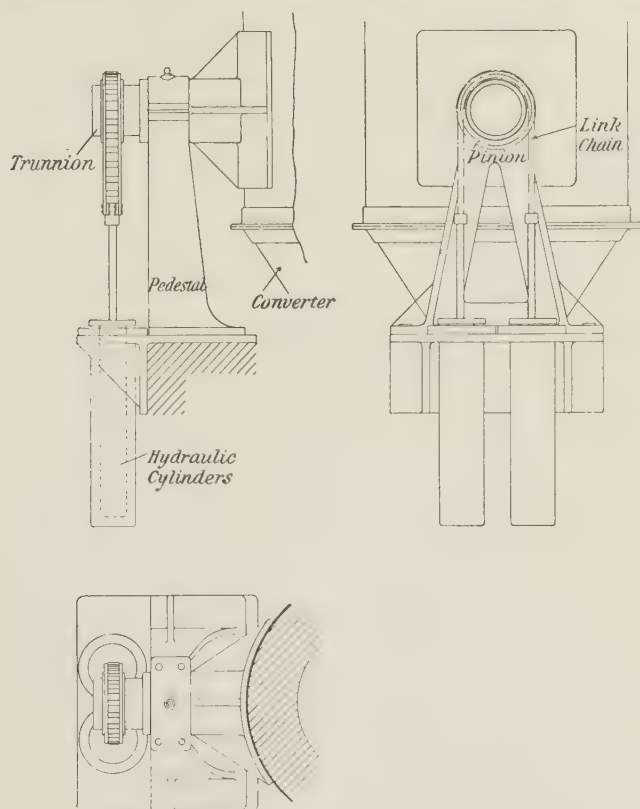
Hydraulic Tipping Gear for Small Converters.
